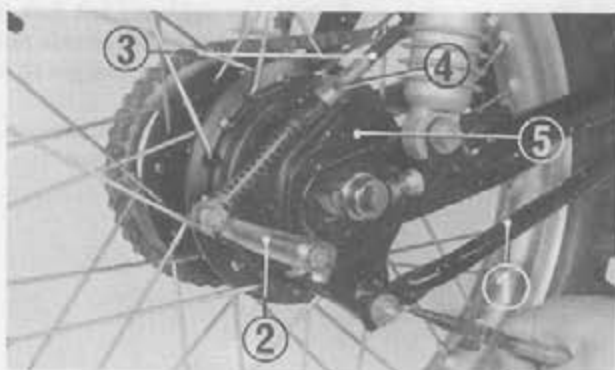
(1) Rear brake stopper arm (2) Rear brake arm (3) Rear brake cable (4) Rear brake adjusting nut (5) Brake panel
